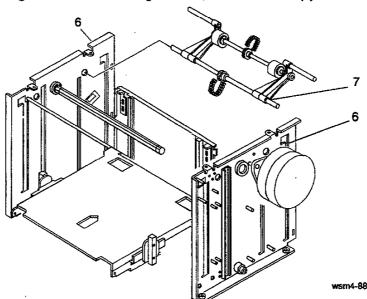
Removing the HCF/HCEF Feed Roll(s)
